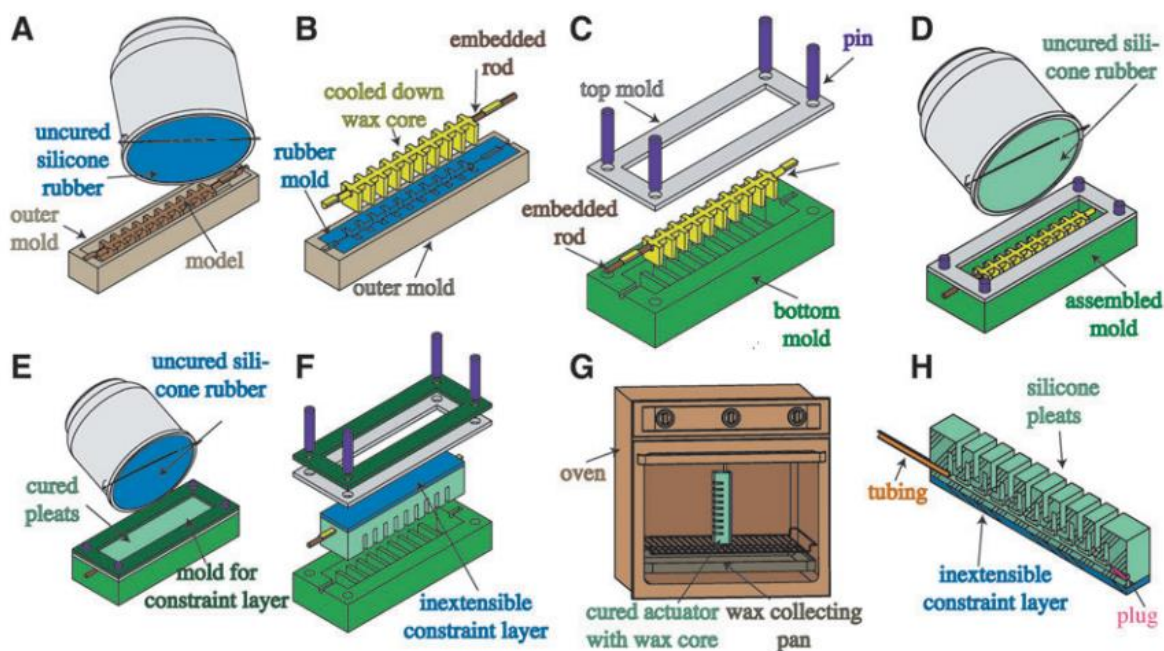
Fabrication process for the pleated actuator morphology: (A) pour and cure a rubber mold; (B) pour wax core with embedded supportive rod; (C) combine bottom mold, top mold, and wax core using pins; (D) pour rubber into assembled mold; (E) pour stiffer rubber on top of the cured actuator to form a constraint layer; (F) remove cured actuator from mold; (G) melt out wax core from the actuator using an oven; and (H) add silicone tubing and plug using silicone sealant (Marchese, Katzschmann, and Rus 2015)
